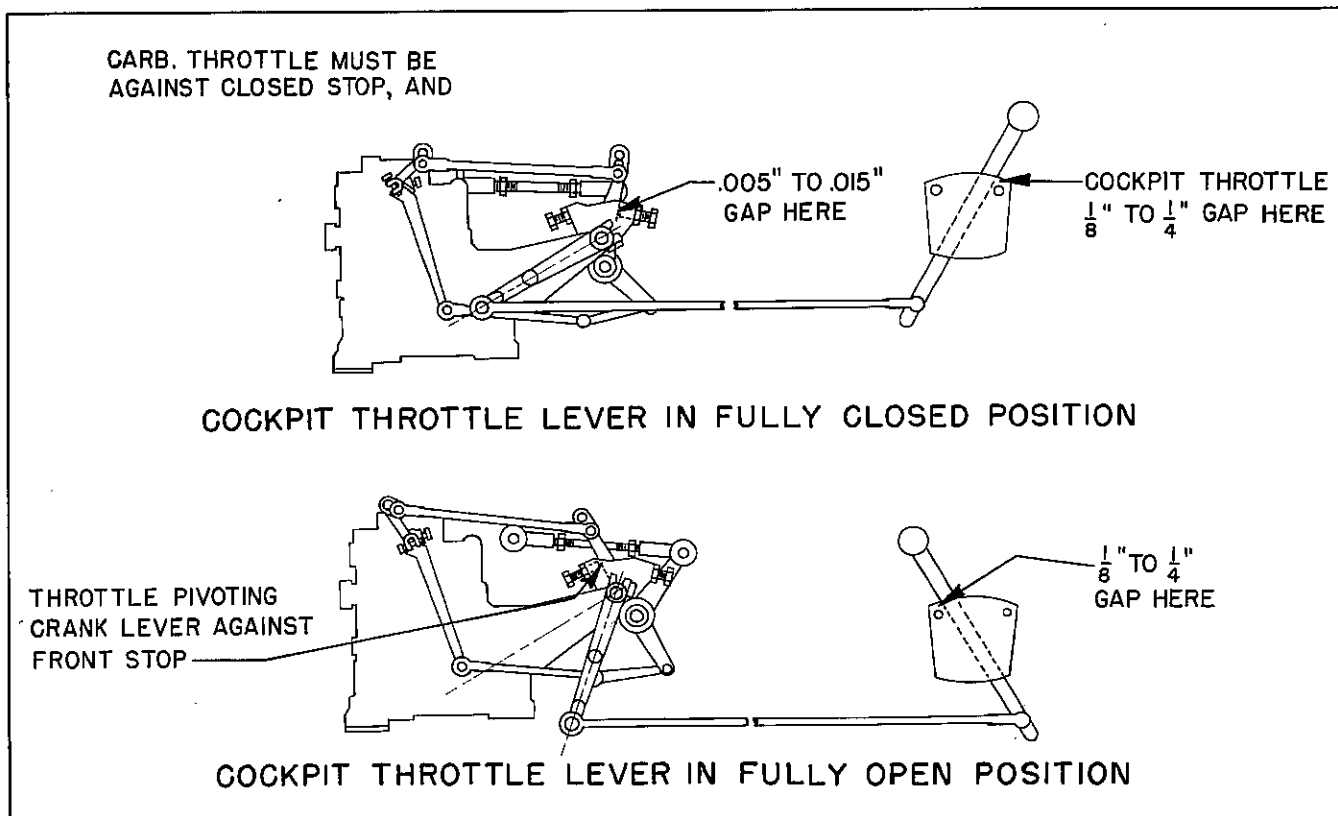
Schematic Sketch of Cockpit Throttle and Regulator Stop Clearances.
